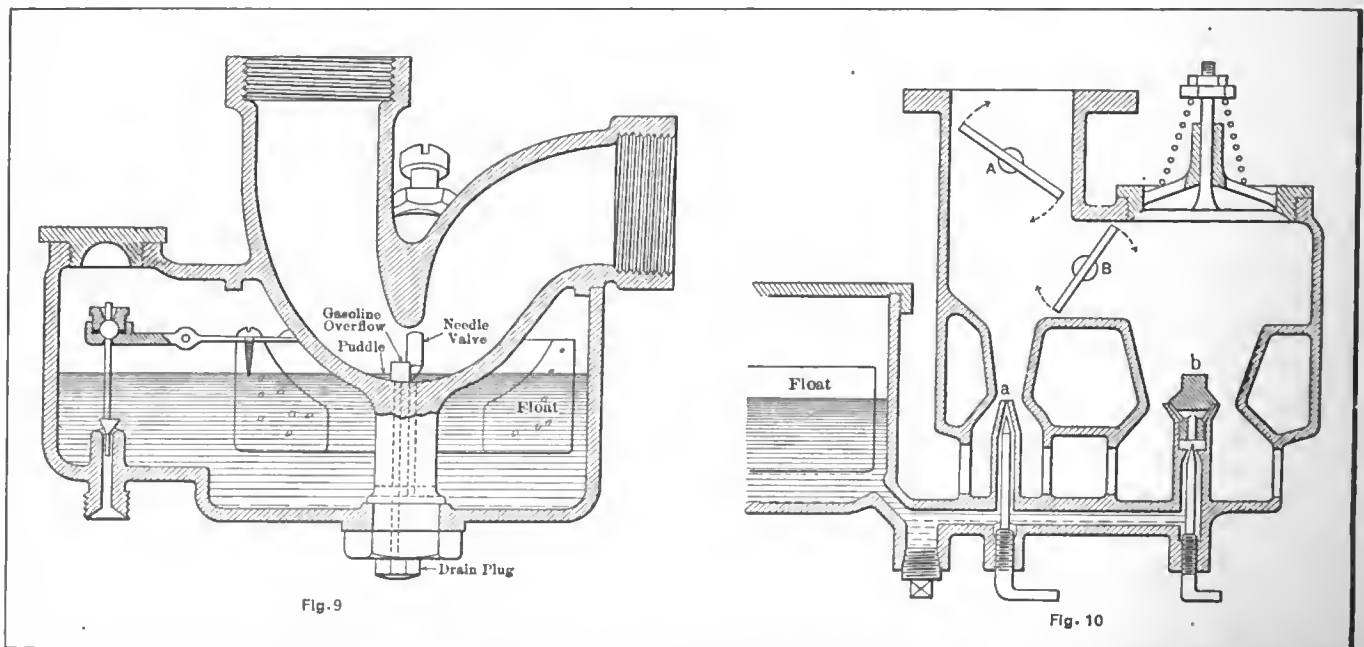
Typical puddle type carbureter. Either the top or side opening can be used for the outlet. No auxiliary air valve is used. Only the gasoline level and needle valve are adjustable. Fig. 10—Two-nozzle type of carbureter. B remains closed until throttle valve A opens enough to pass as much mixture as the spray nozzle A can furnish.
